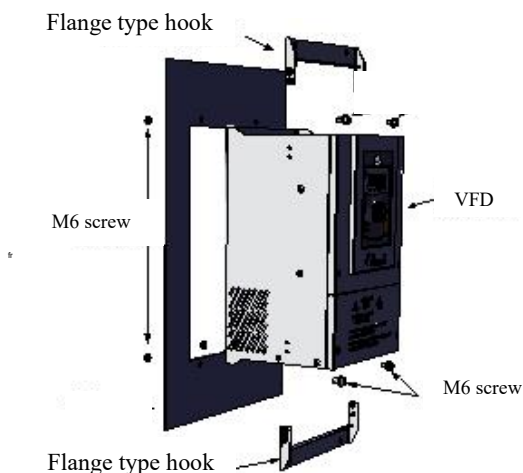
380V VFD sheet metal structure 18-55kW wall-through installation diagram
